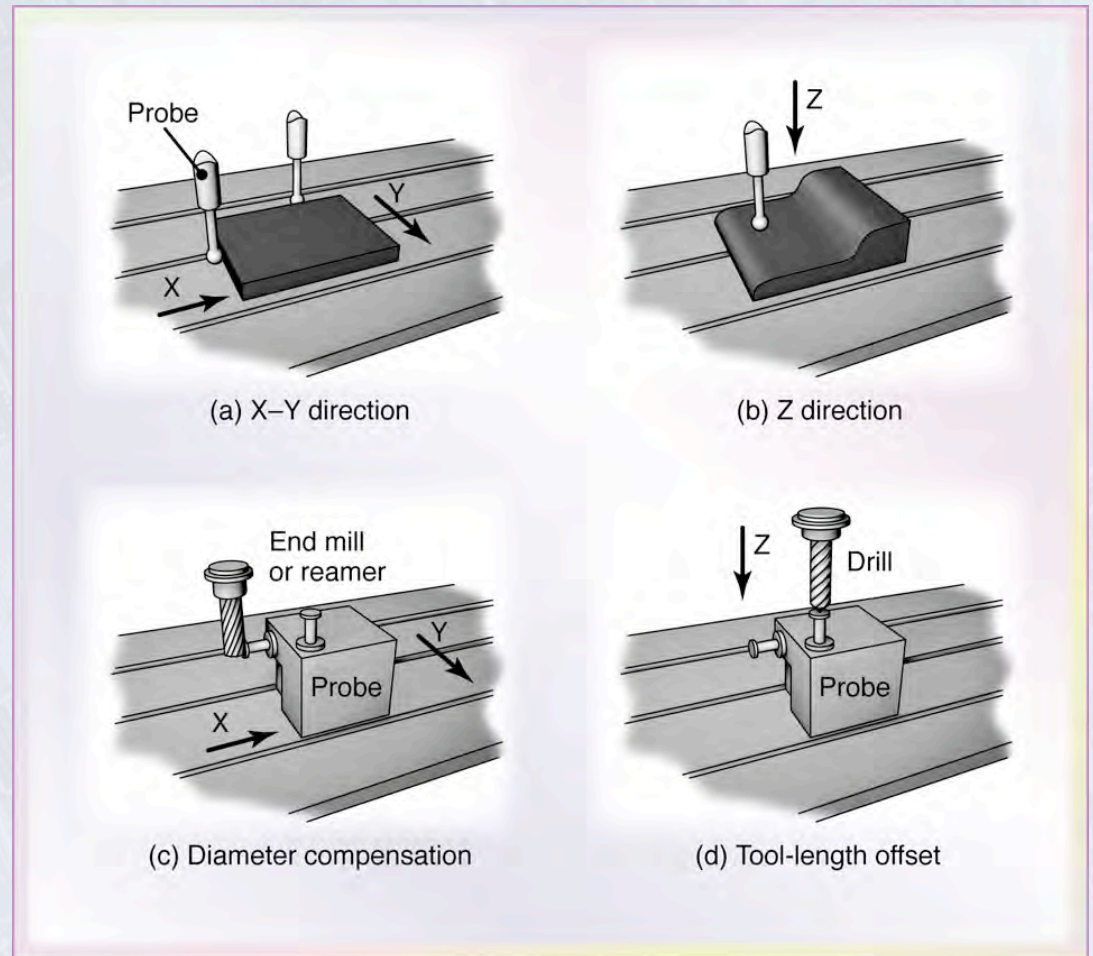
Touch probes used in machining centers for determining workpiece and tool positions and surfaces relative to the machine table or column. Touch probe (a) determining the X-Y (horizontal) position of a workpiece, (b) determining the height of a horizontal surface, (c) determining the planar position of a surface of a cutter (for instance, for cutter-diameter compensation), and (d) determining the length of a tool for tool-length offset. *Source:* Courtesy of Hitachi Seiki Co., Ltd.
